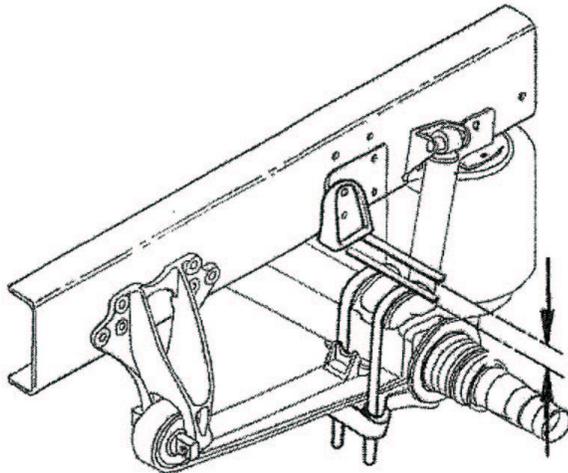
Neway ARD Air Spring Height Measurement (Side View)
